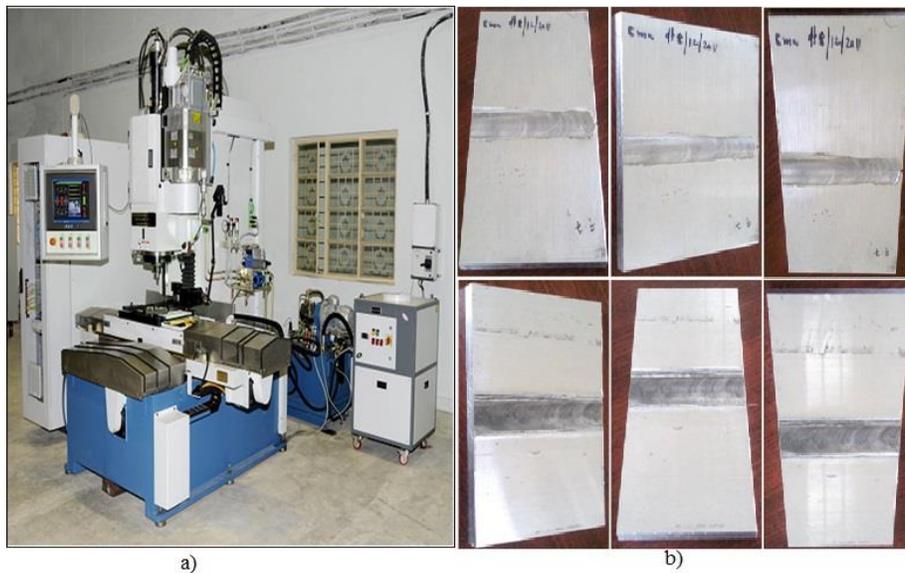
a) Friction Stir Welding Setup b) Welded AA7075 Alloy Plates
